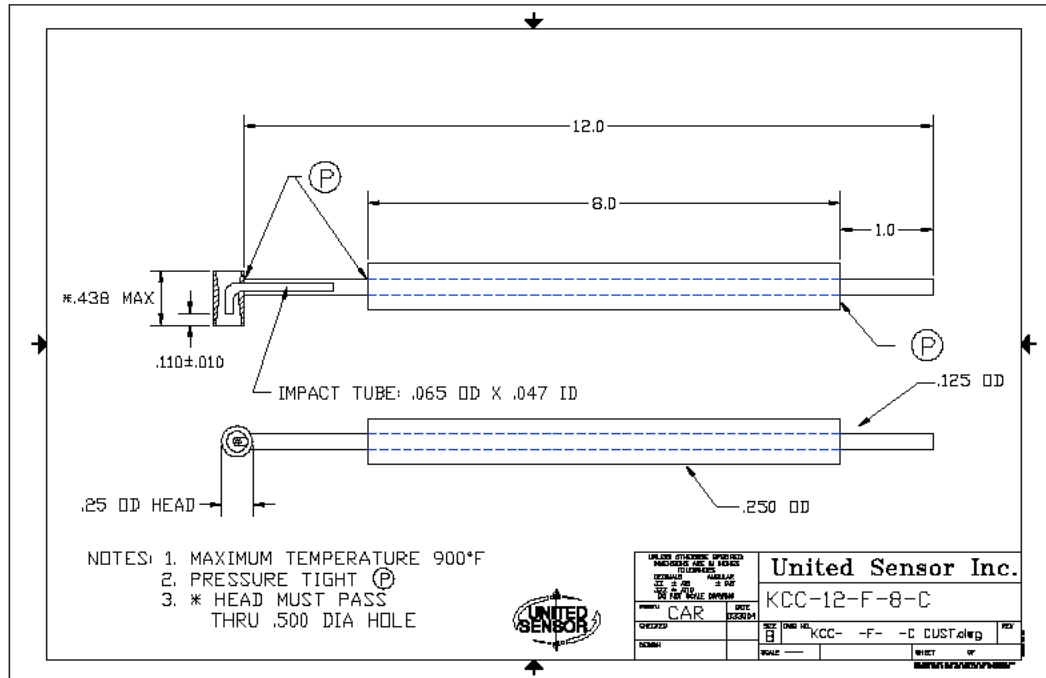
Kiel Probe Drawing (United Sensor Inc.)
